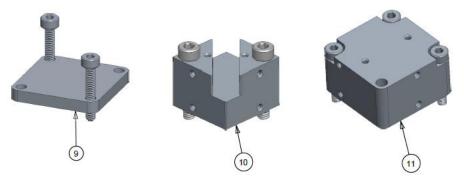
Accelerometer Mounts (24000-00216/24000-00217/24000-00218)
